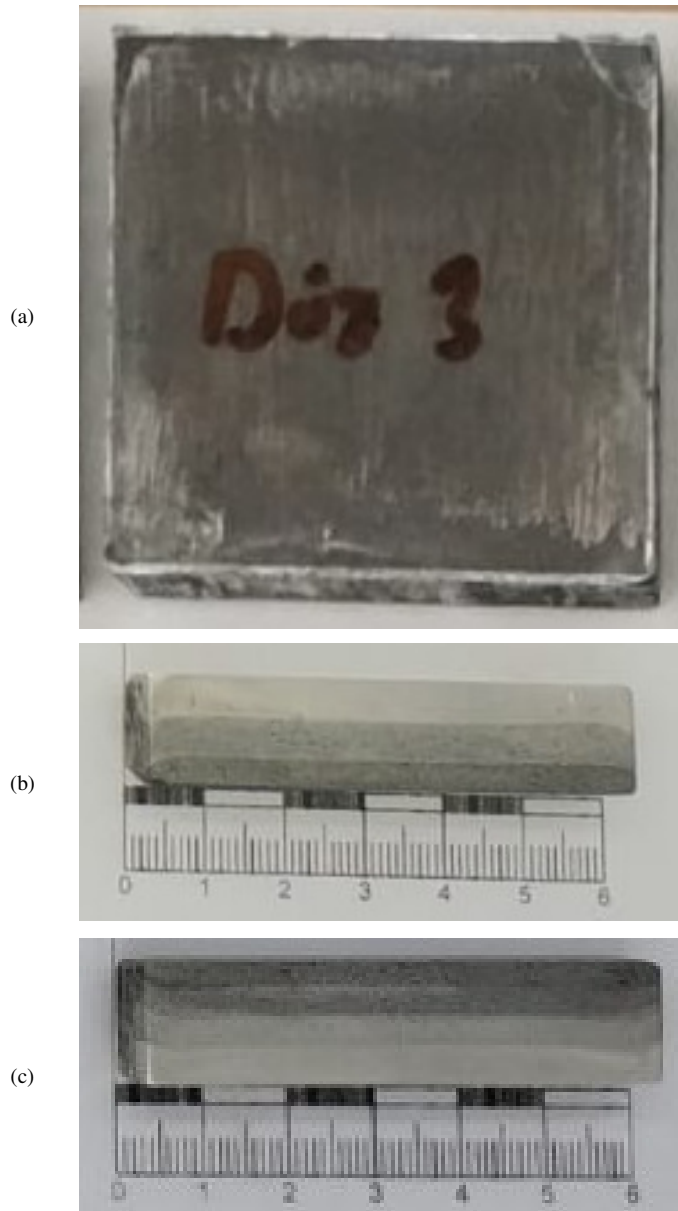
FGM sample images: (a) After sintering, (b) 3-layer cross-sectional view, (c) 4-layer cross-sectional view.
